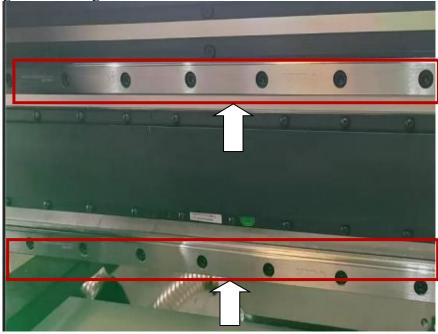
Lead screw and guide rail lubricated with the lubricating oil
